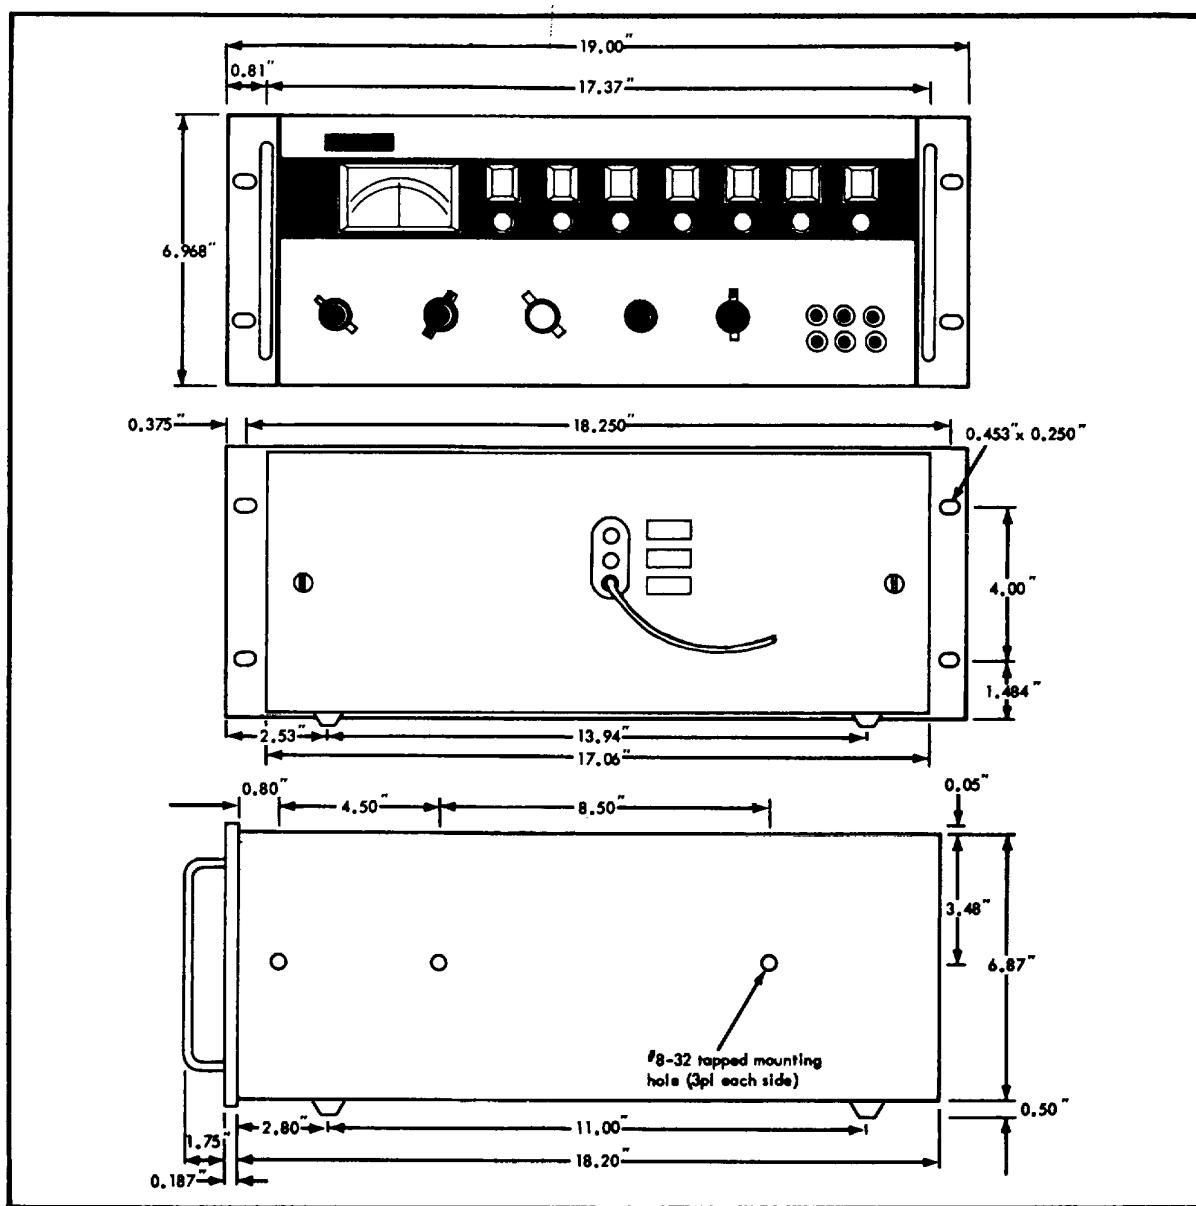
MODEL 332B/332D OUTLINE DRAWING
